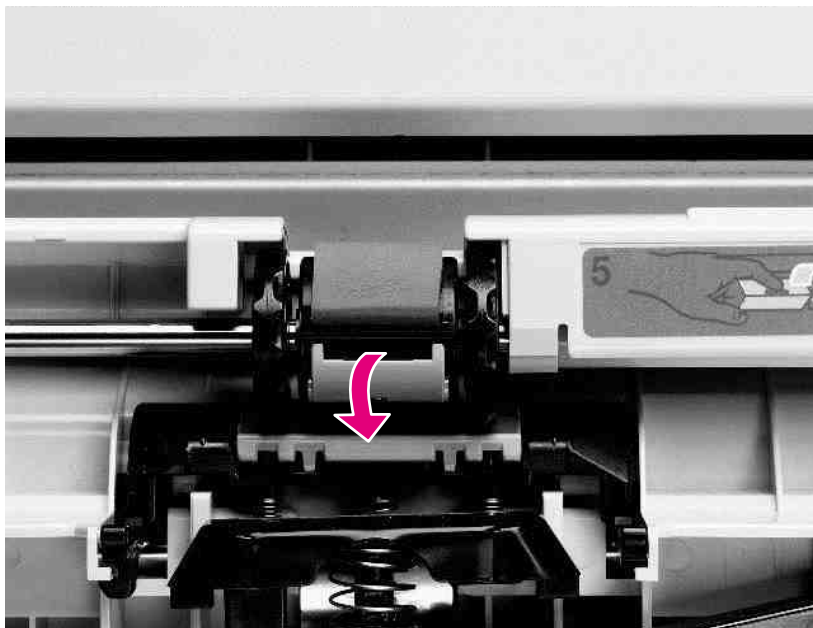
Removing the pickup roller (shown with envelope entrance cover removed)
